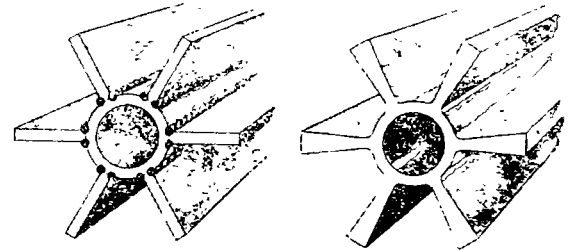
Welded assemblies can often be redesigned to extrusions. Cost is reduced and strength and accuracy improved.
